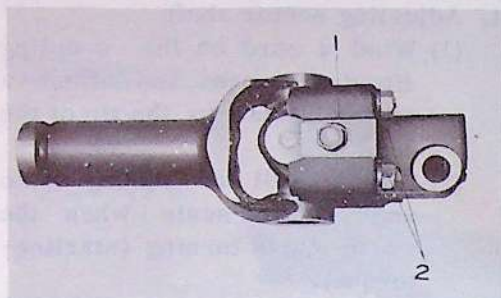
Intermediate Shaft V5130 Disassembly
